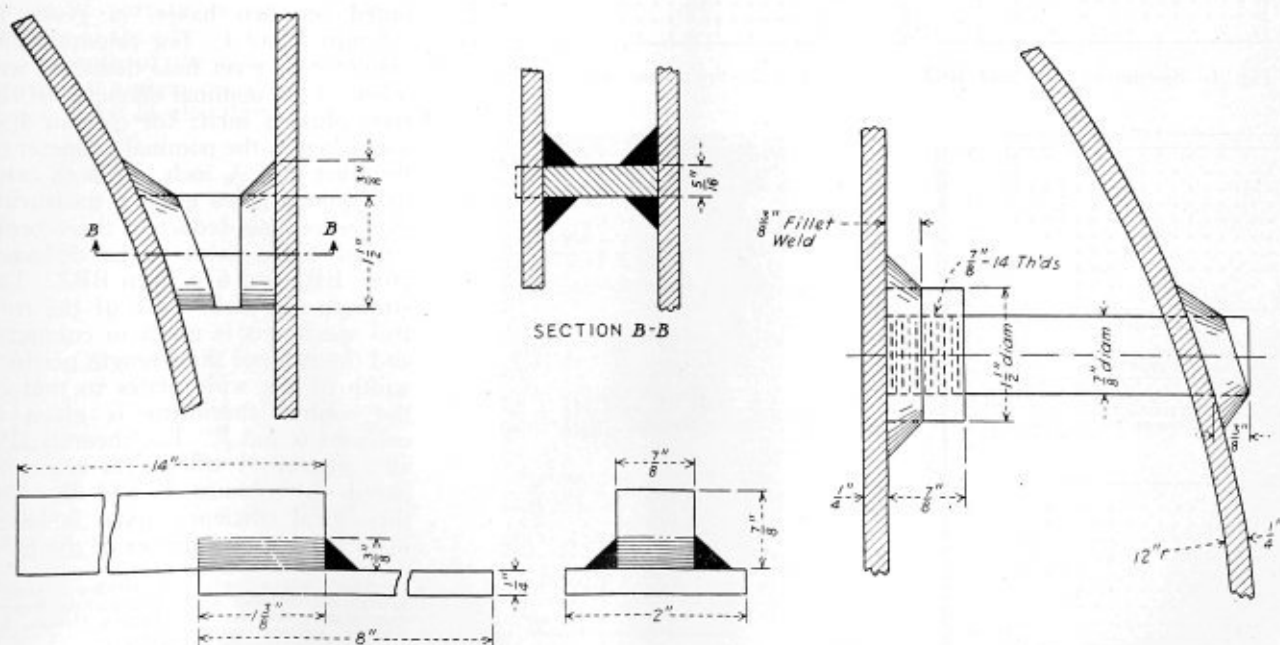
Details of staybolt welding for testing boilers
